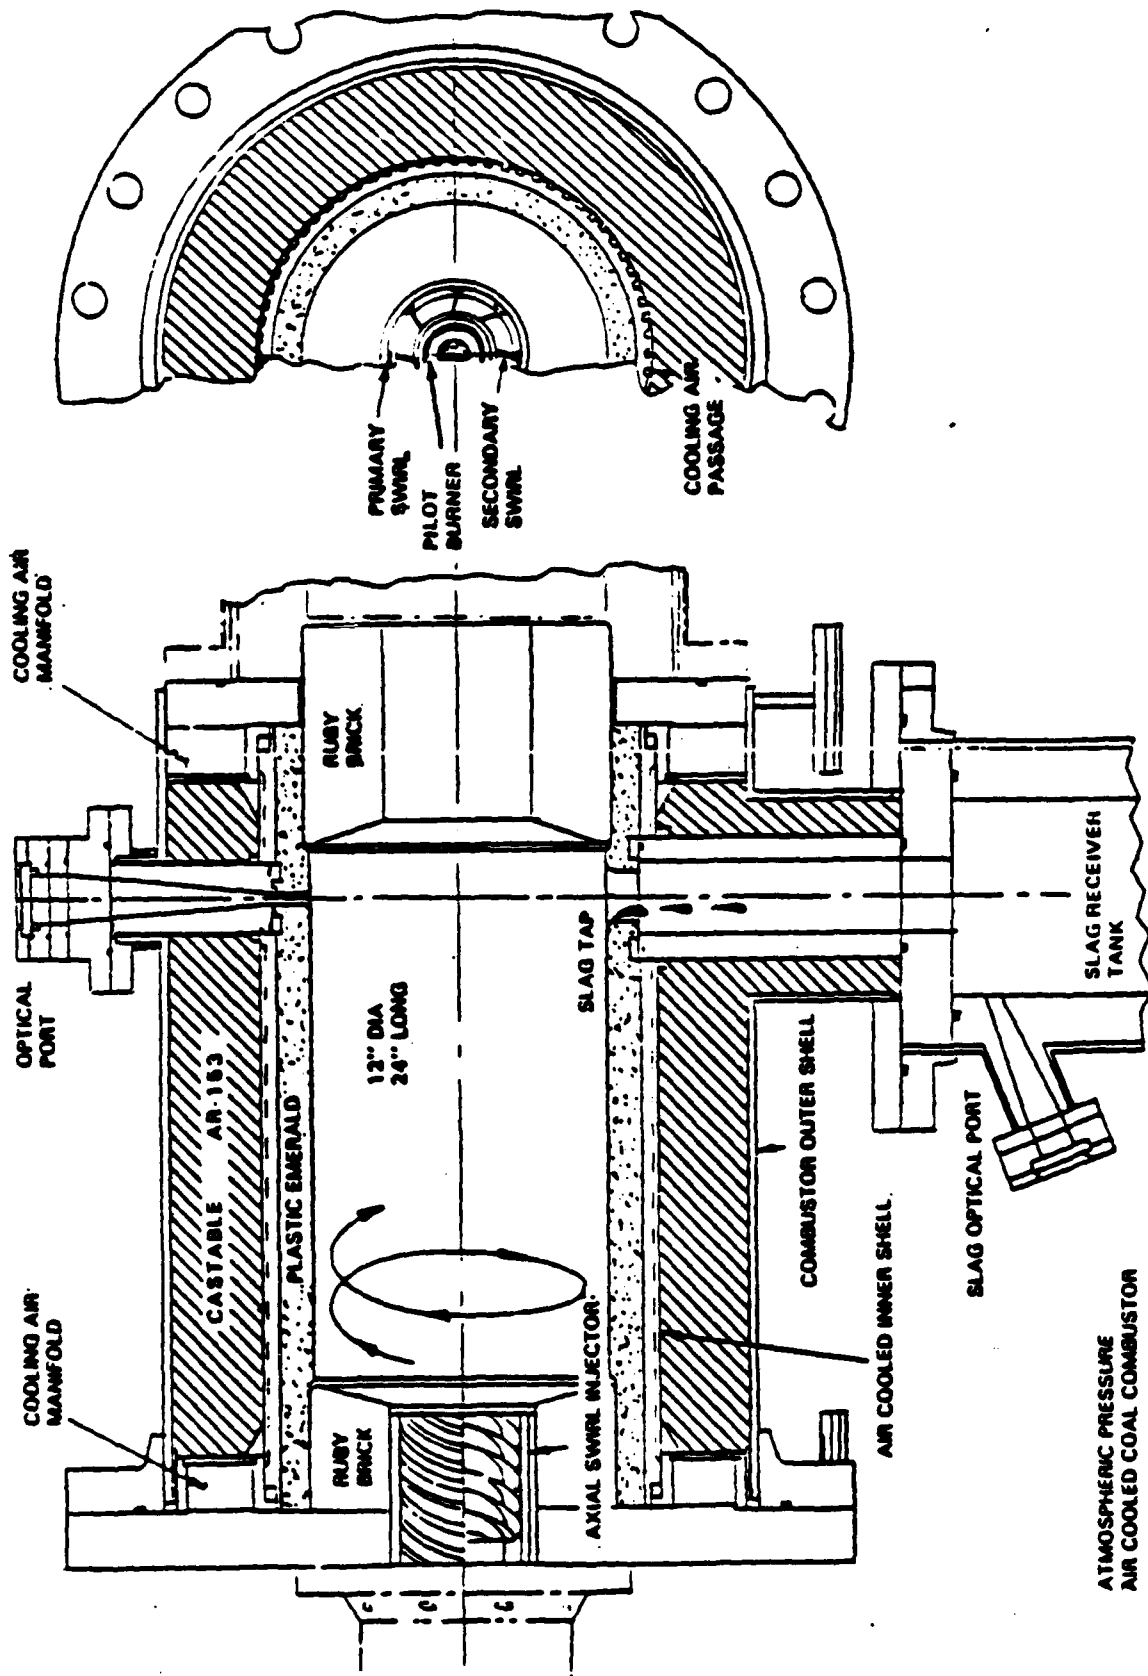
Schematic of 1 MMBTU/hr Air Cooled Cyclone Coal Combustor-(Ref. 37)
